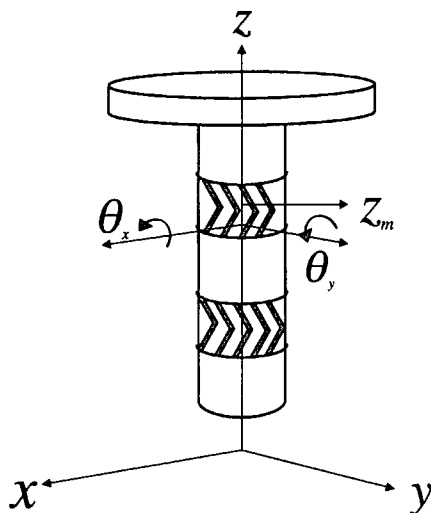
Geometry and coordinate system of the spindle motor bearing.
